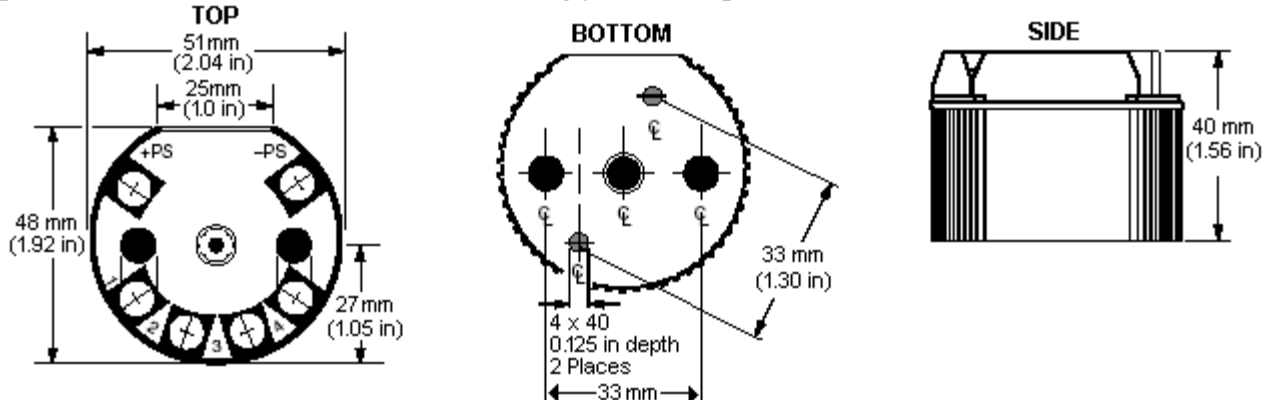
Dimensions for THZ in the DIN rail-mount housing.
